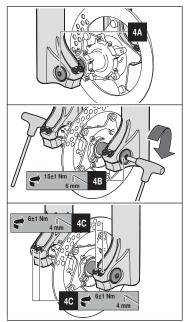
Wheel install on ø32 fork with a 20mm diameter through-hole axle
